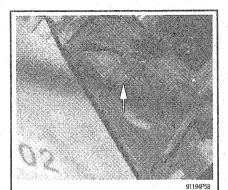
remove the bolt retaining the CMP sensor to the front cover and . . .
